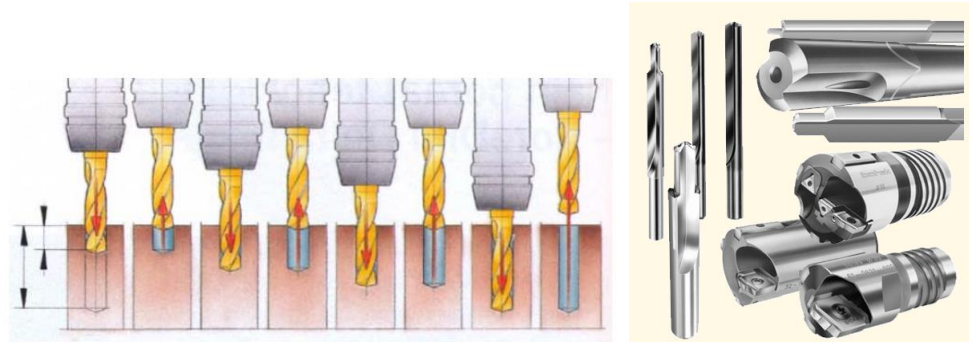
Deep hole drilling cycle by traditional drilling tools
